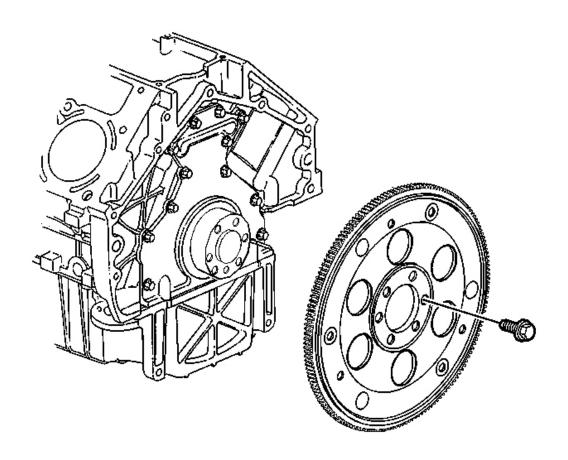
View Of Engine Flywheel & Bolt Courtesy of GENERAL MOTORS CORP.
